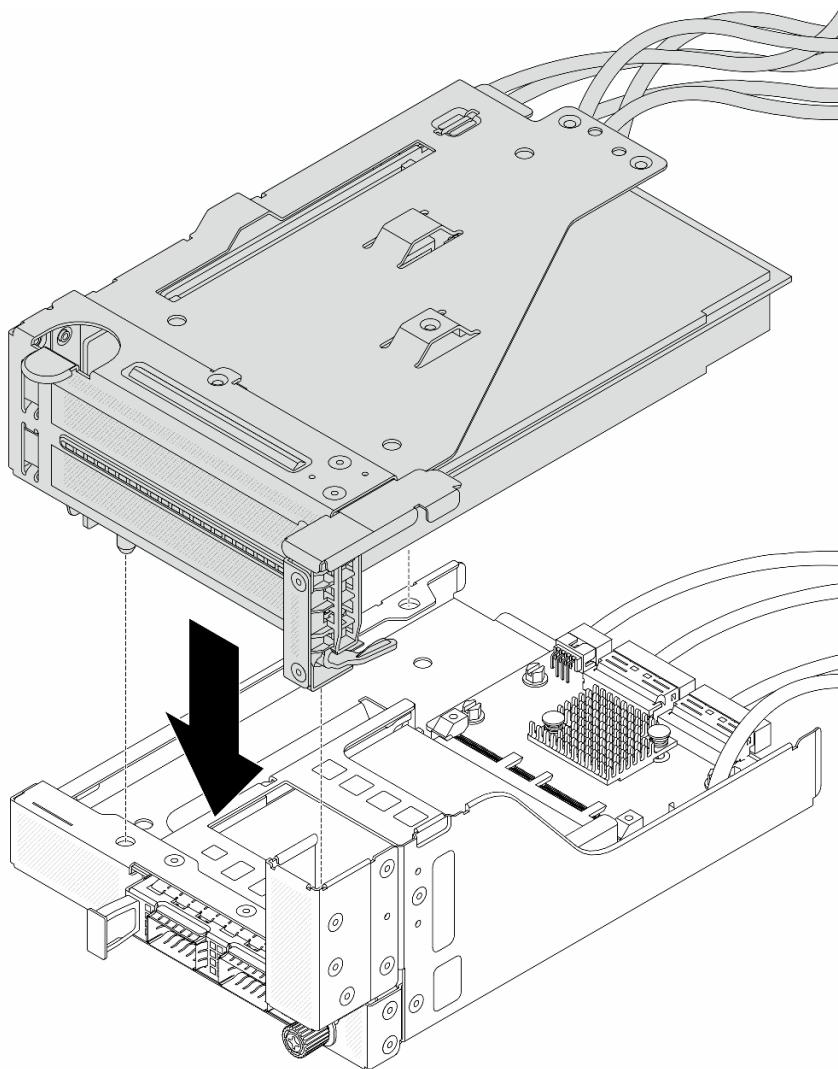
Installing the riser 5 assembly on the front OCP assembly
